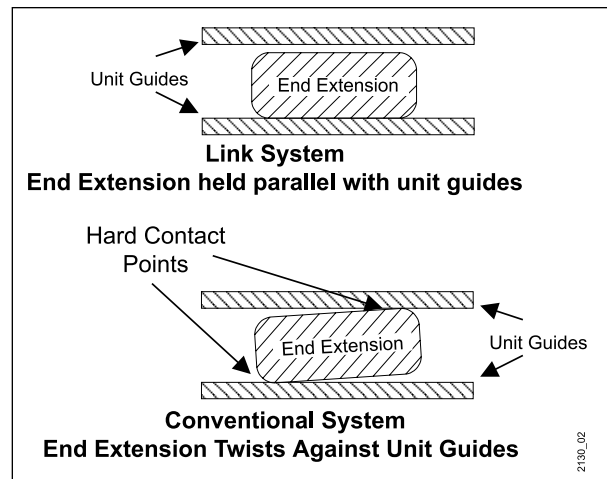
Binding Mechanism of End-Extension/ Side Frame Interface
